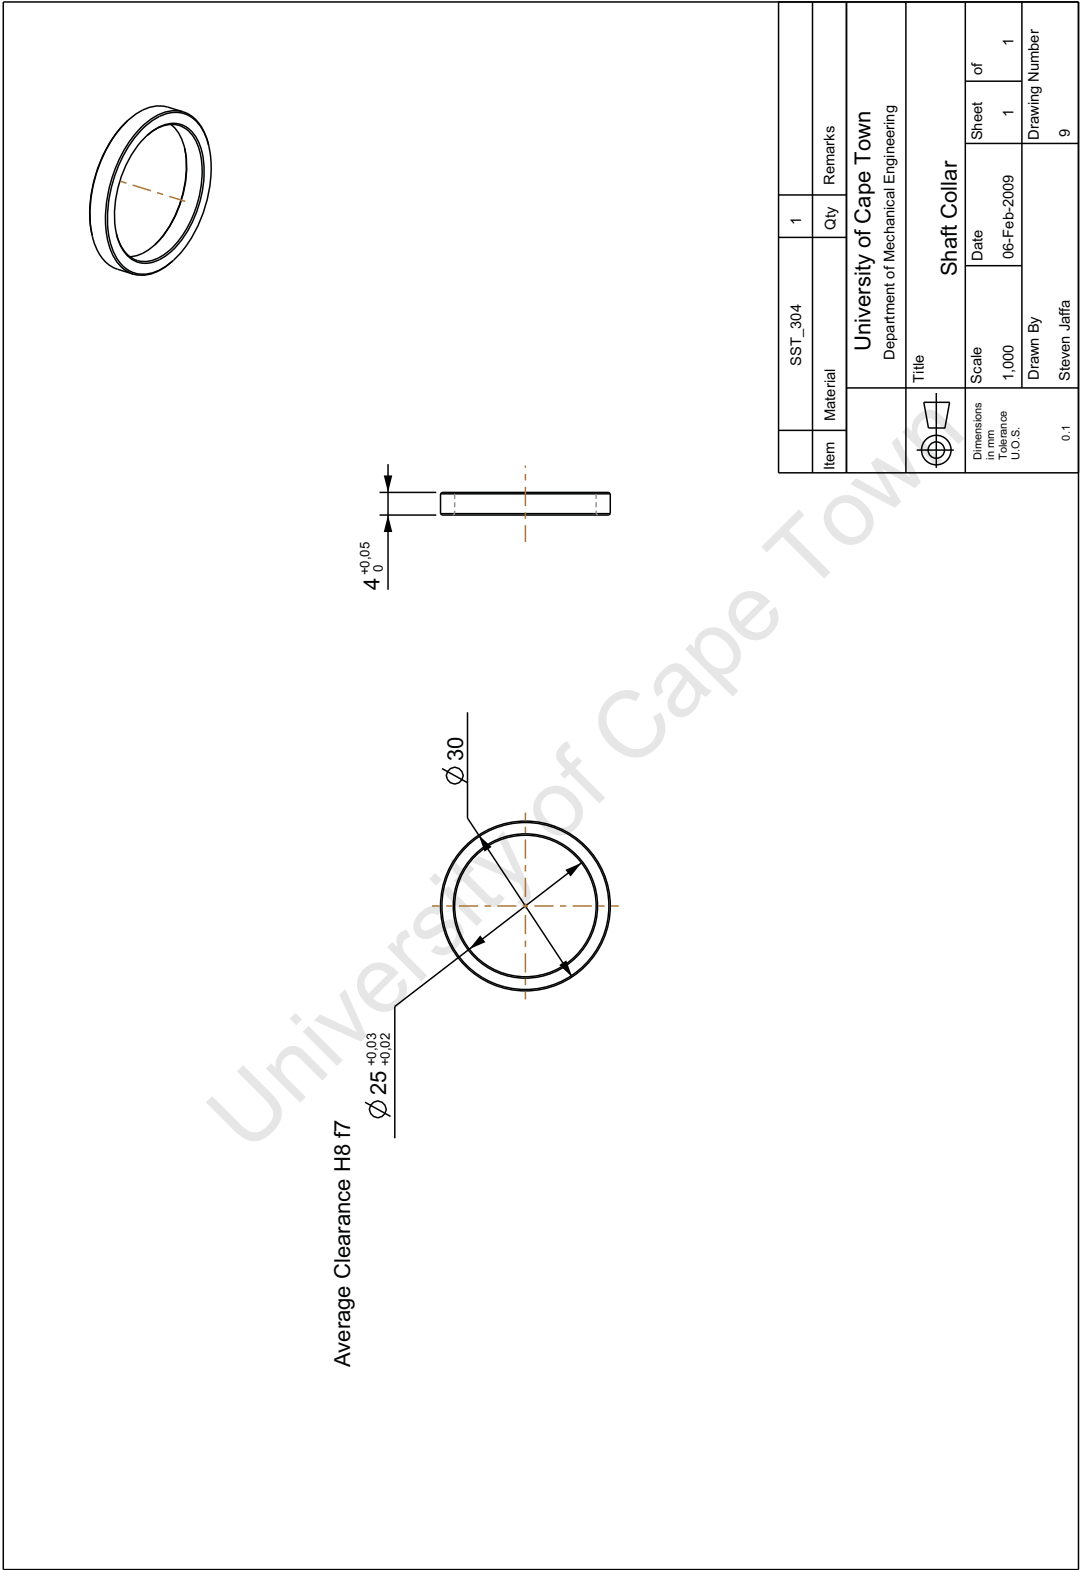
Manufacturing Drawing: Pulley Shaft Collar.
